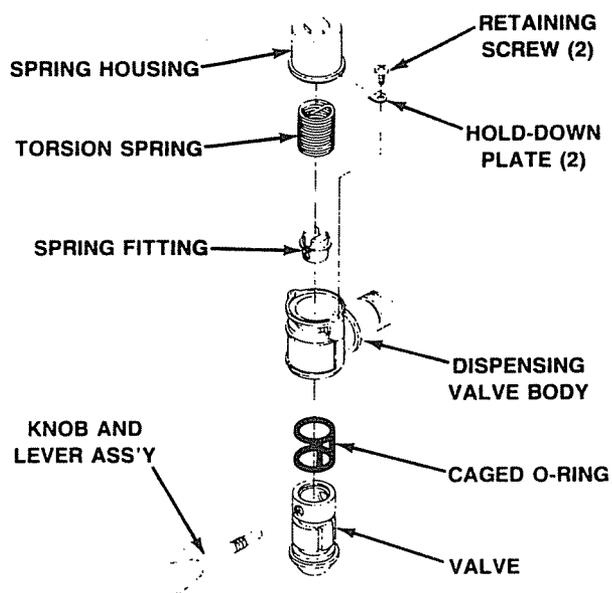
SELF-CLOSING DISPENSING VALVE
